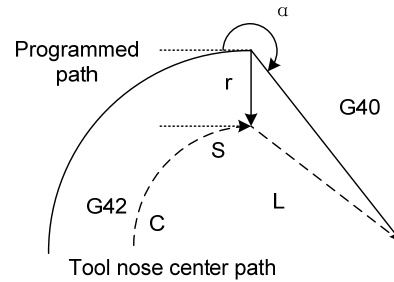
Circular-linear (moving inner and canceling offset)
